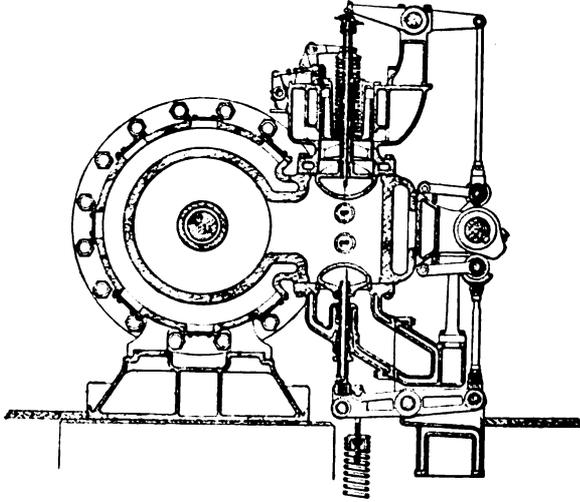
Cylinder with side Valve Boxes. Snow Steam Pump Works.
